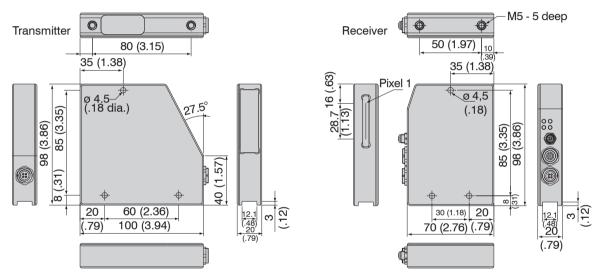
Dimensional drawing optoCONTROL 1220-28, dimensions in mm (inches), not to scale
